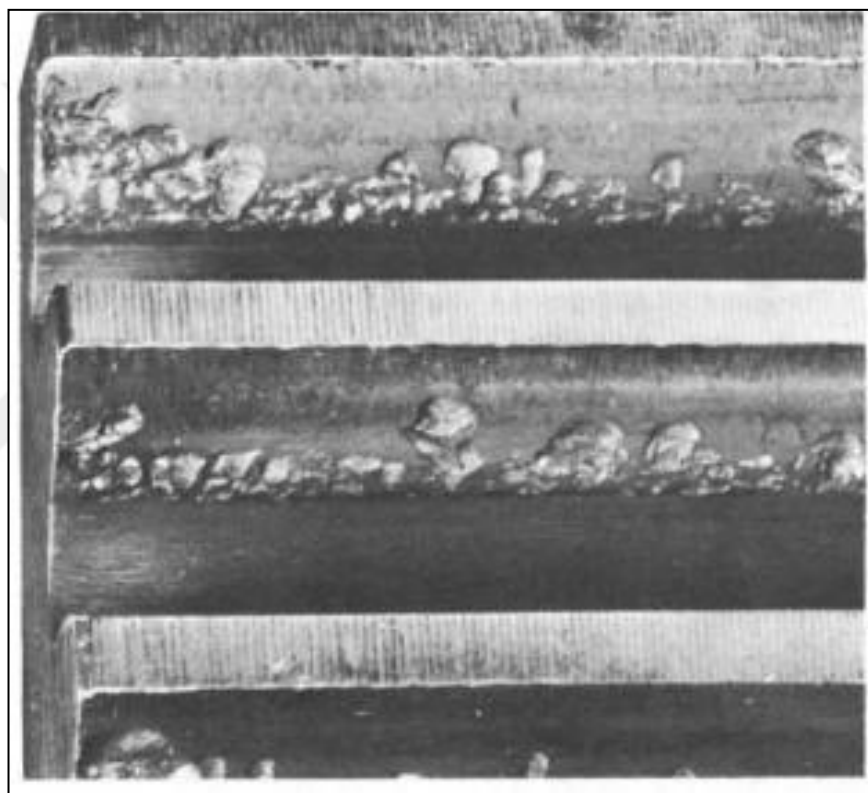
Typical tooth pitting (Shiple, 1967)
